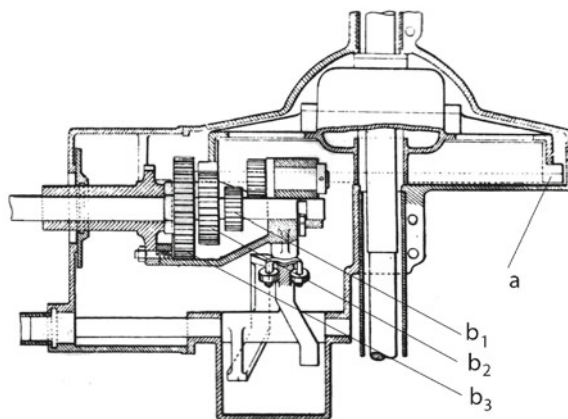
Sizair Naudin gearbox of 1907. This design can be assimilated to a sliding train gearbox, with bevel gears (redrawn from Genta and Morello 2009)
